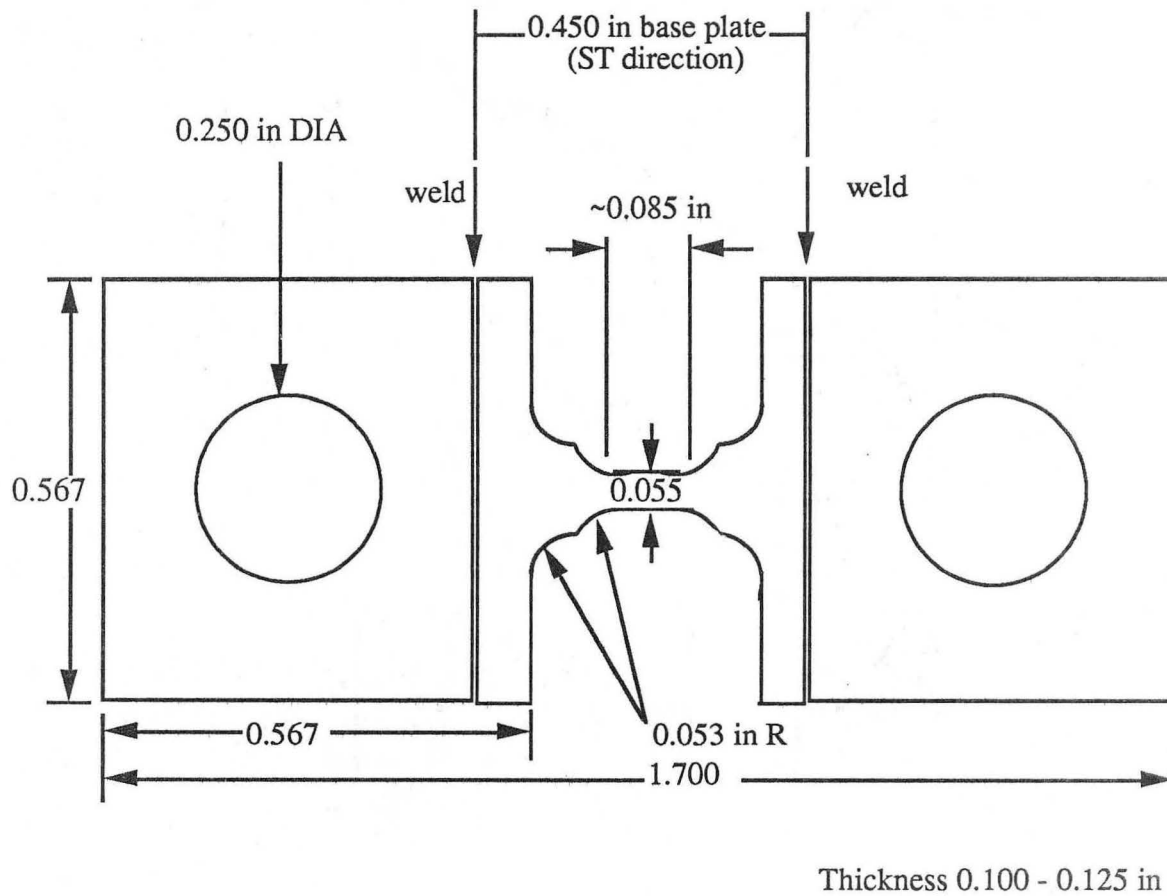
Design for short-transverse tensile specimen. Grip sections are attached by electron-beam welds.
